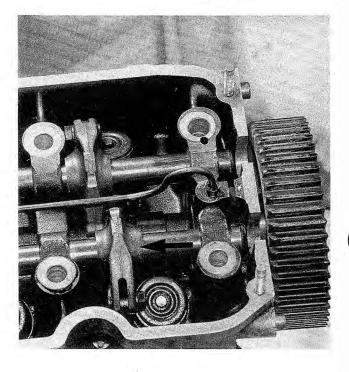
Rocker arm positioned (arrow) for removal of exhaust-side rocker arm shaft.
